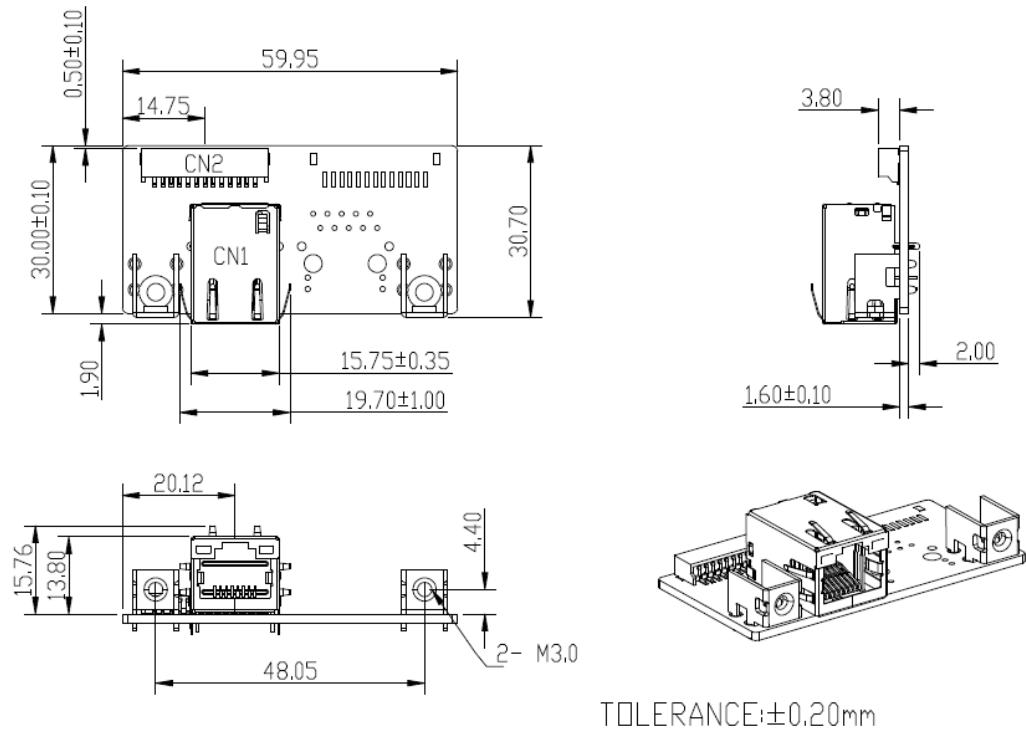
Mounting Hole Daughter Board Drawing (EMPL-G102-C3/W3)
